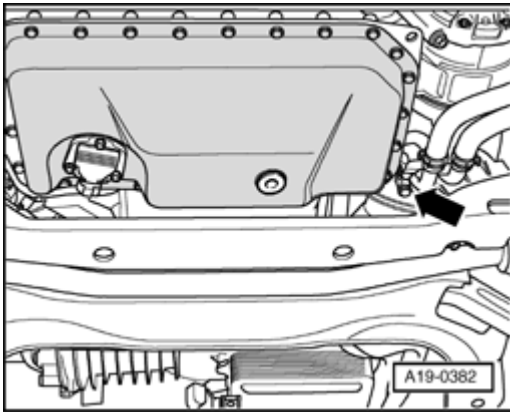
Installing Drain Plug At Oil Filter Bracket With New Gasket In Engine At Left
